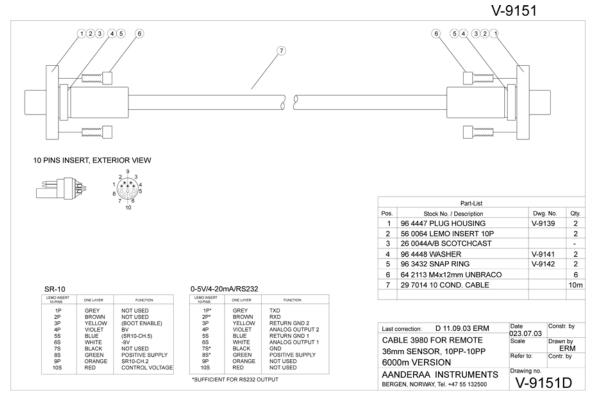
Drawing Cable 3980 (1000-6000 m).
